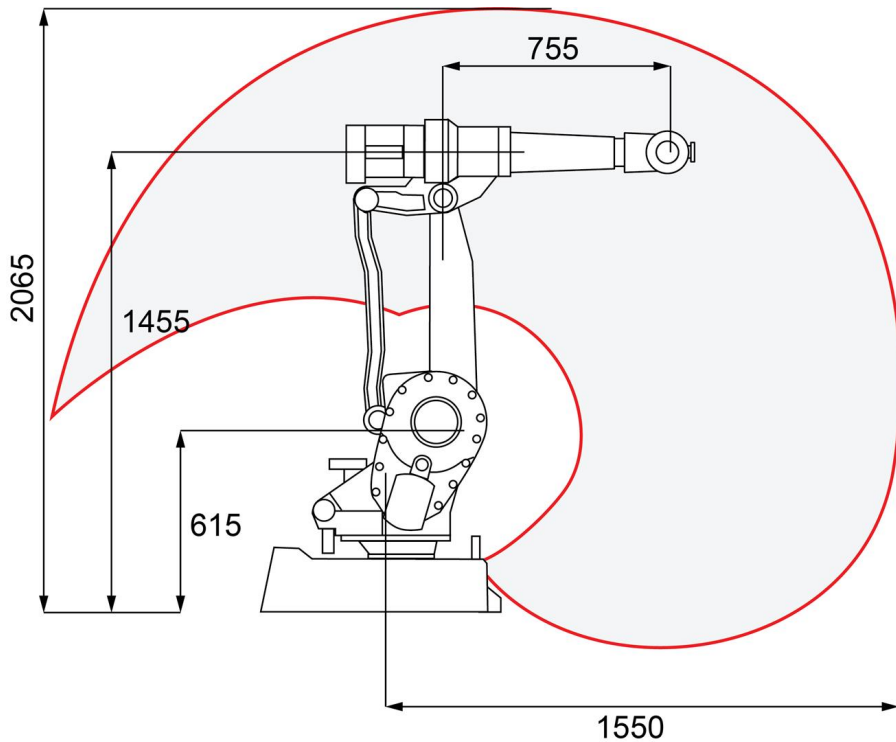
IRB 2400/10: This 6-DOF robot has a much larger workspace than many traditional AM machines, and can reach points within the workspace with an arbitrary orientation of the end effector. Dimensions are given in mm. Image: [www.Abb.com](http://www.Abb.com) [13]
